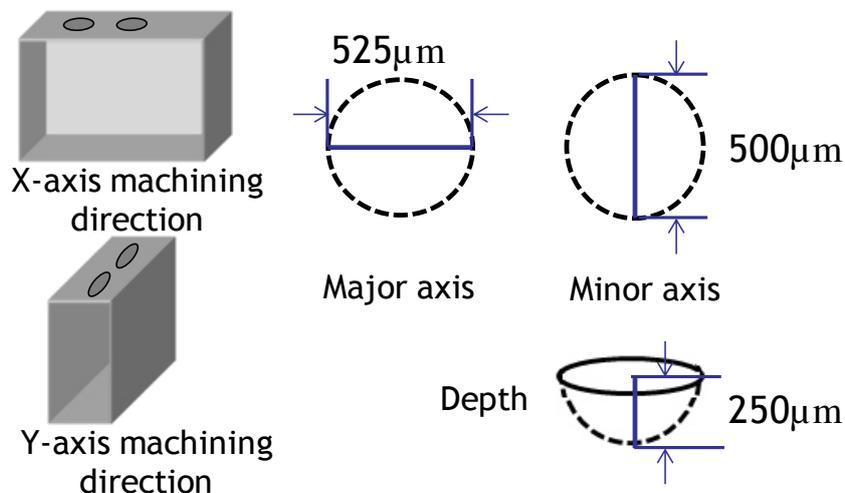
Sectional view and desired dimensions of micro-cavity (without scale).
